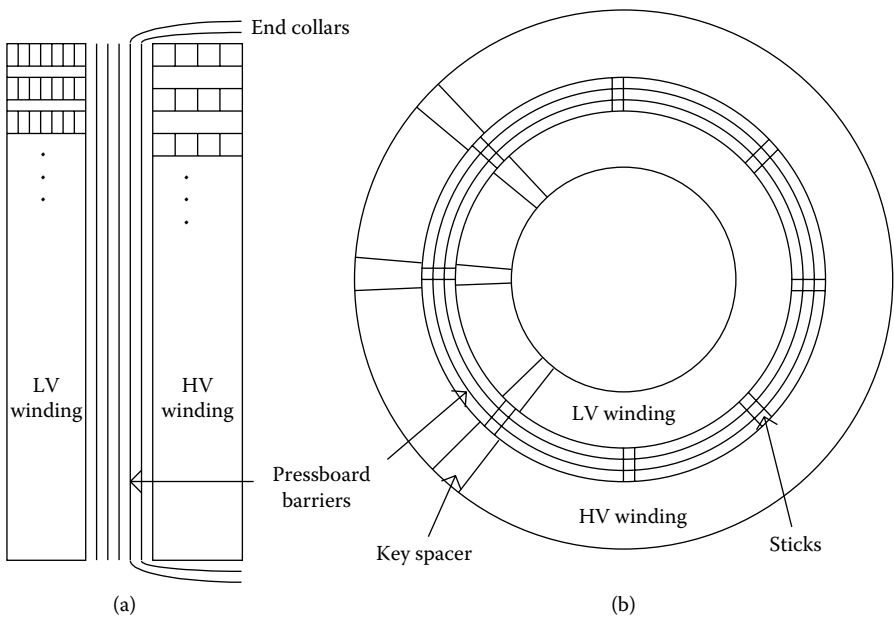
Major insulation structure consisting of multiple barriers between windings. Not all the key spacers or sticks are shown. (a) Side view, (b) top view.
